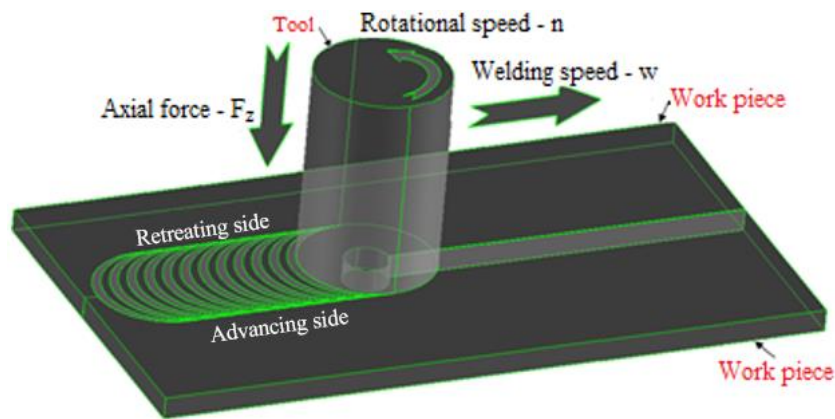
Schematic presentation of the FSW welding process
